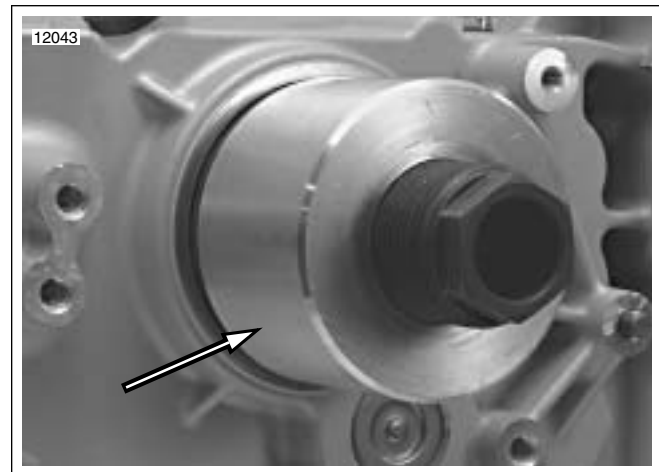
Place Installer (Part No. HD-47856-1) over Adapter (Typical)
